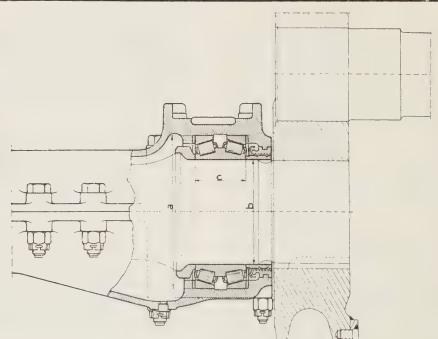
Timken taper roller bearing of the inside type with single bearing with two rows of rollers shrunk on the journal (canon type box on the driving axles of the S. N. C. F. 2-8-2-R locomotives).
